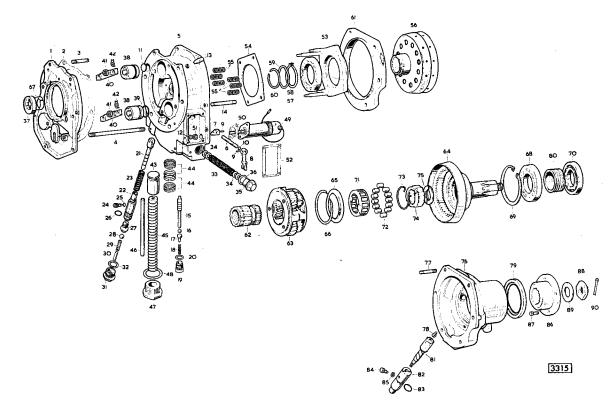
Exploded view of the front and rear casing assemblies. (Overdrive)
